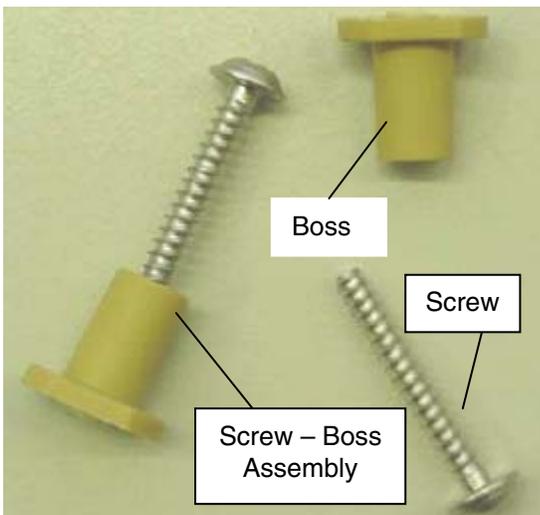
Test modes/specimens (an injection molded boss and self-tapping screw – Delta 60).
